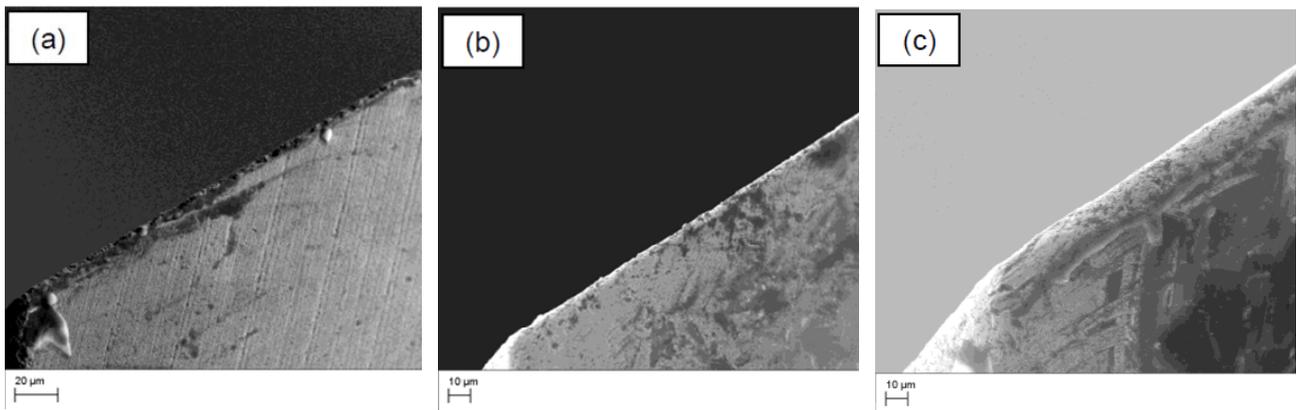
Sharp tool (a), Manual honed tool (b), Automatic honed tool (c).
